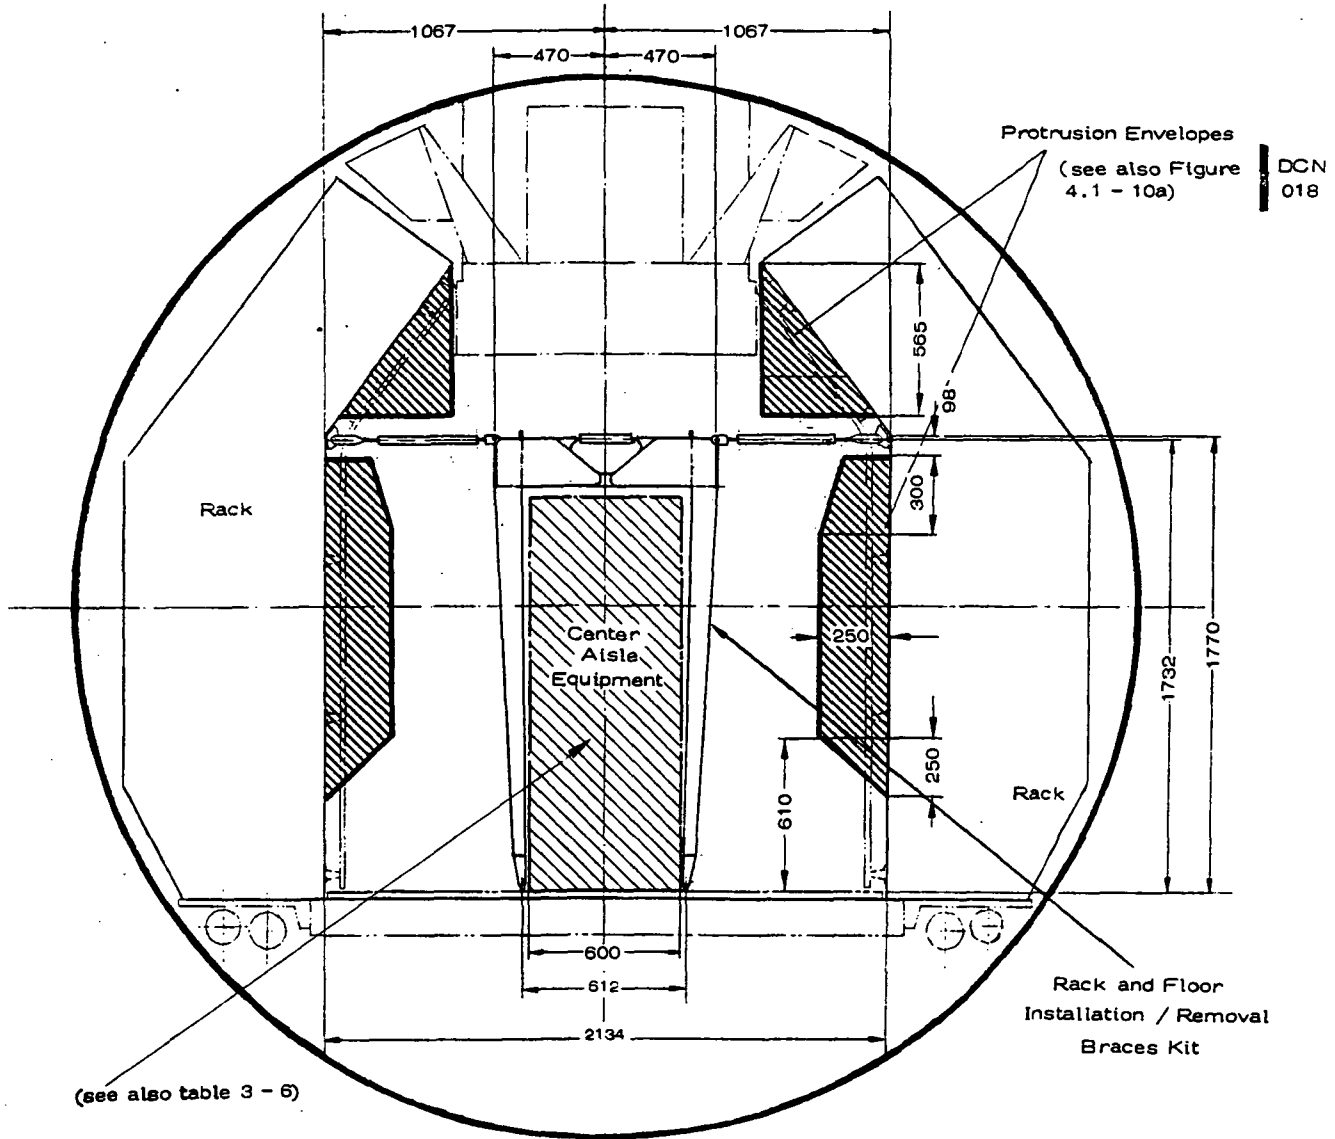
8 : Racks and Floor Installation / Removal Braces Kit Clearance
